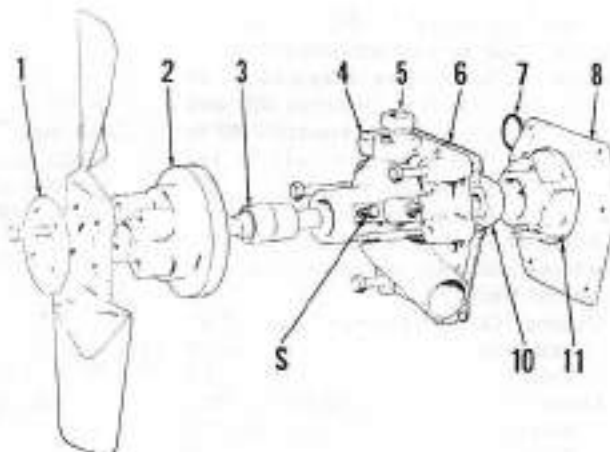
Exploded view of water pump assembly used on model 1200 and on model 990 with 4/49 engine. Note: A 7-blade moulded nylon fan is used on 990 and late 1200 water pumps; refer to (3-Fig.78).
